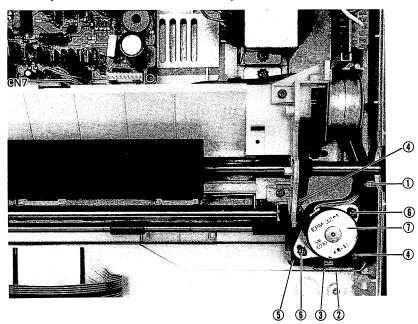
PTS Sensor and Carriage Motor Removal
